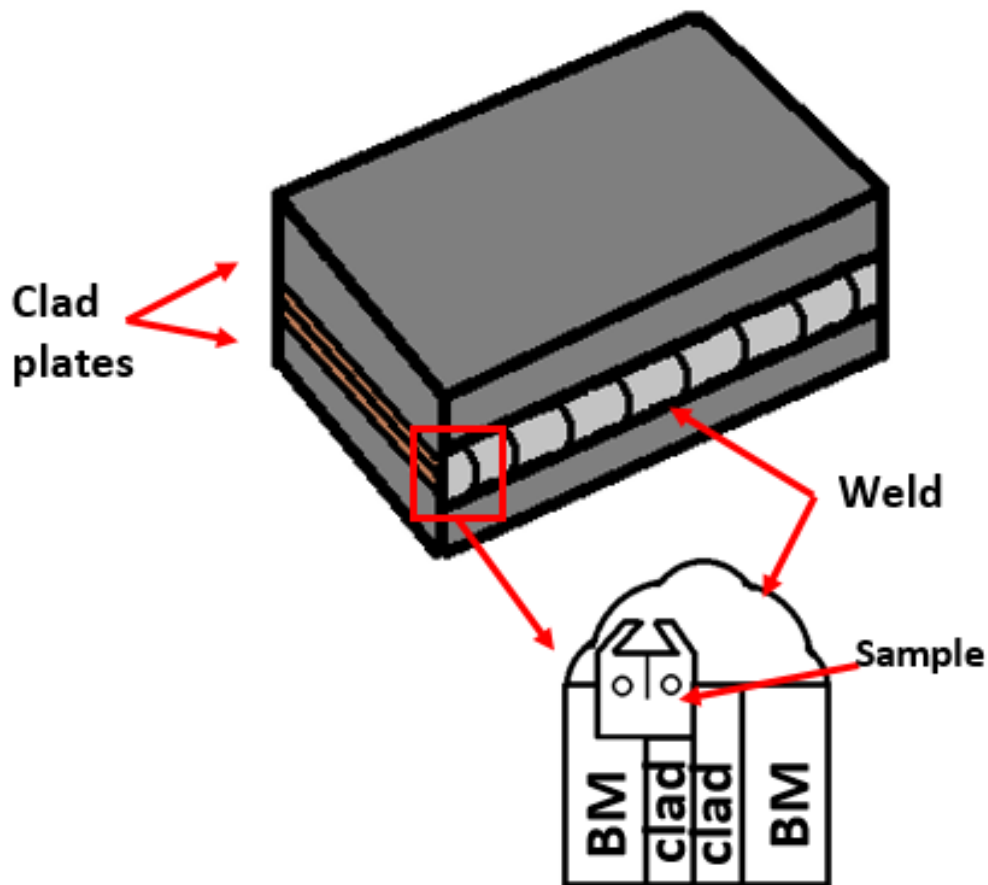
The B samples were extracted from two clad plates that had been welded together.
